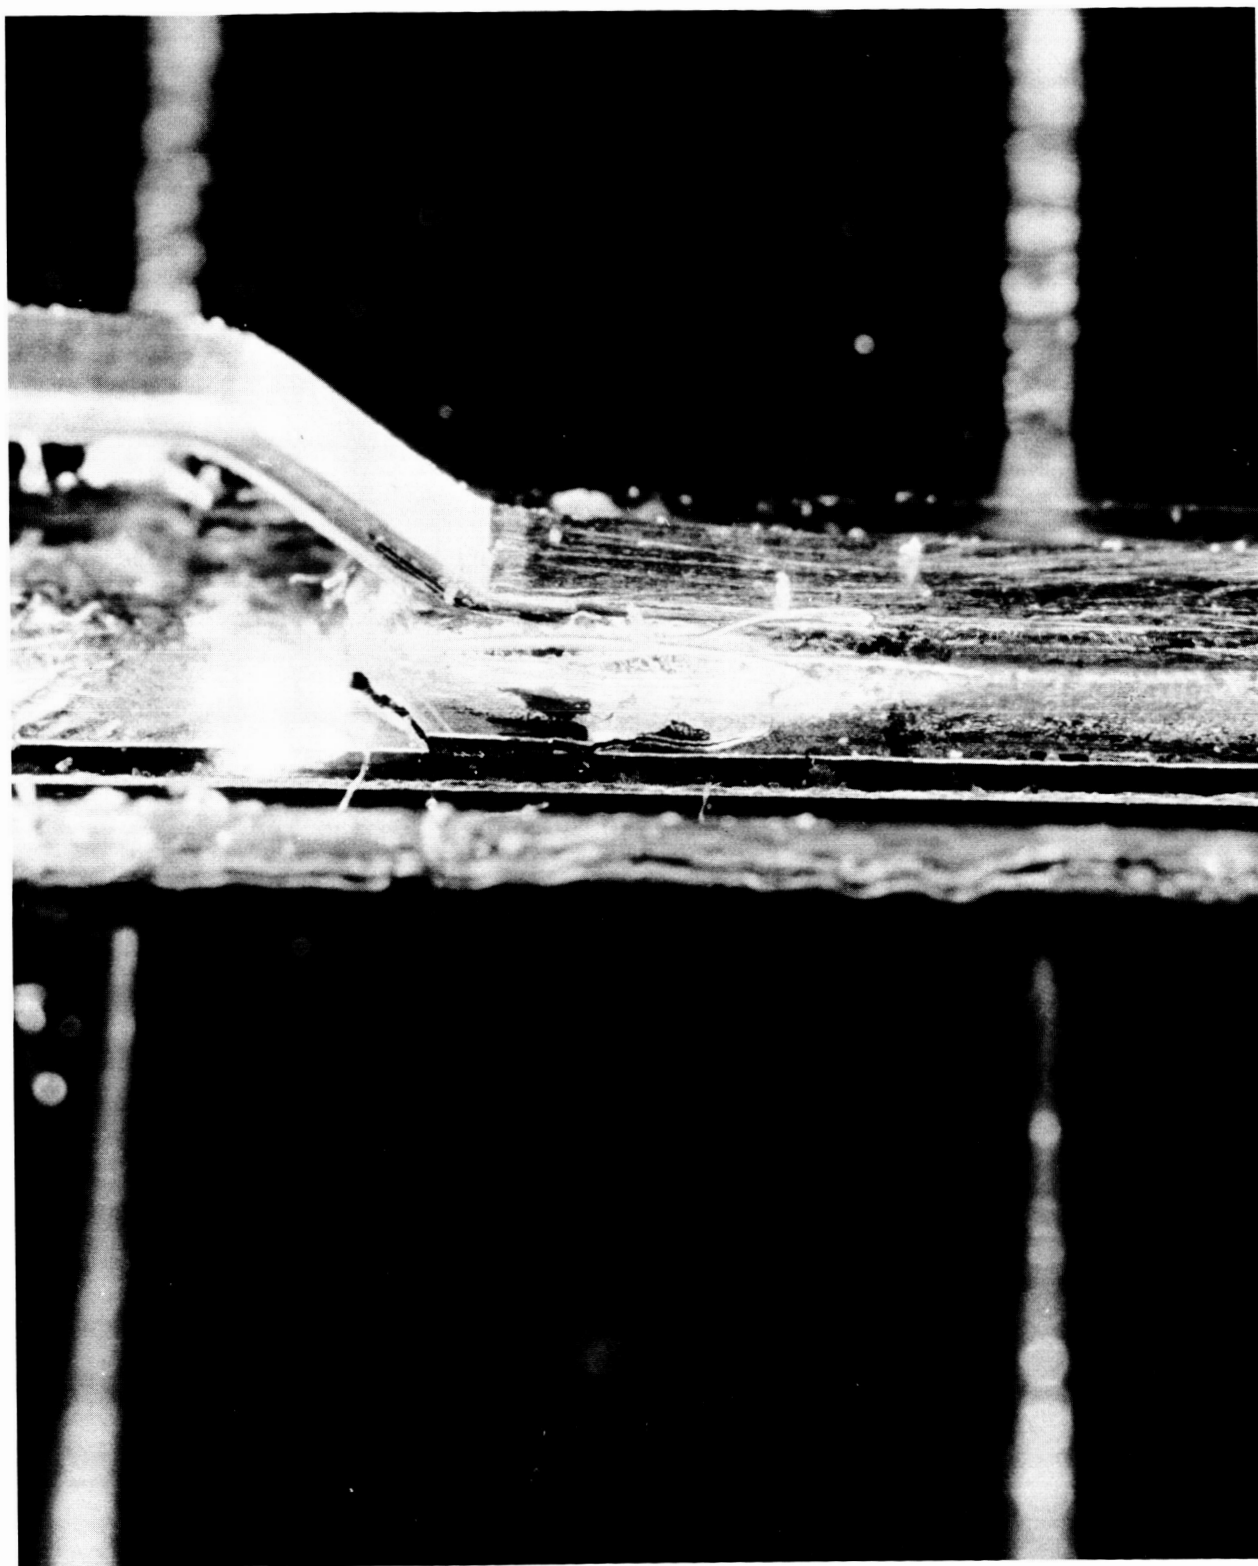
N-interconnector solder joint failure (configuration C7-12)
